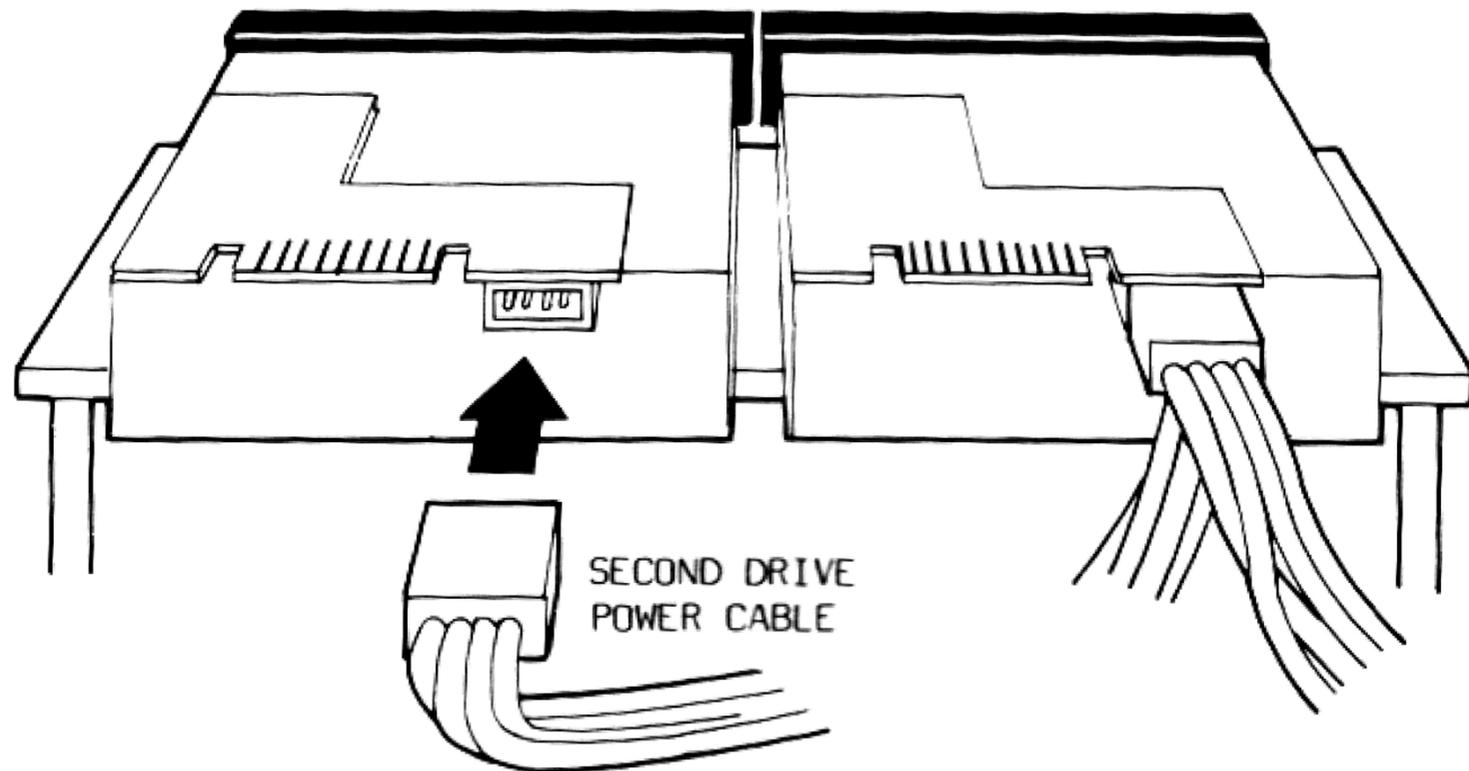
Connecting the Power Cable to the Disk Drive
